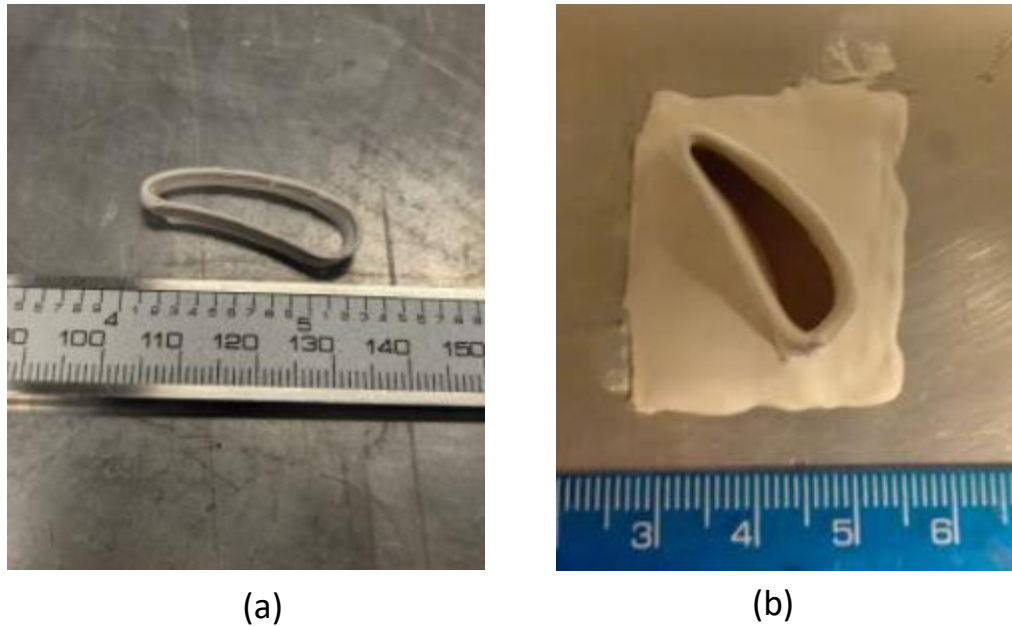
(a) 3D Printed Mold Sample for Turbine Blade without Base, (b) Turbine Blade Mold Sample with Base
